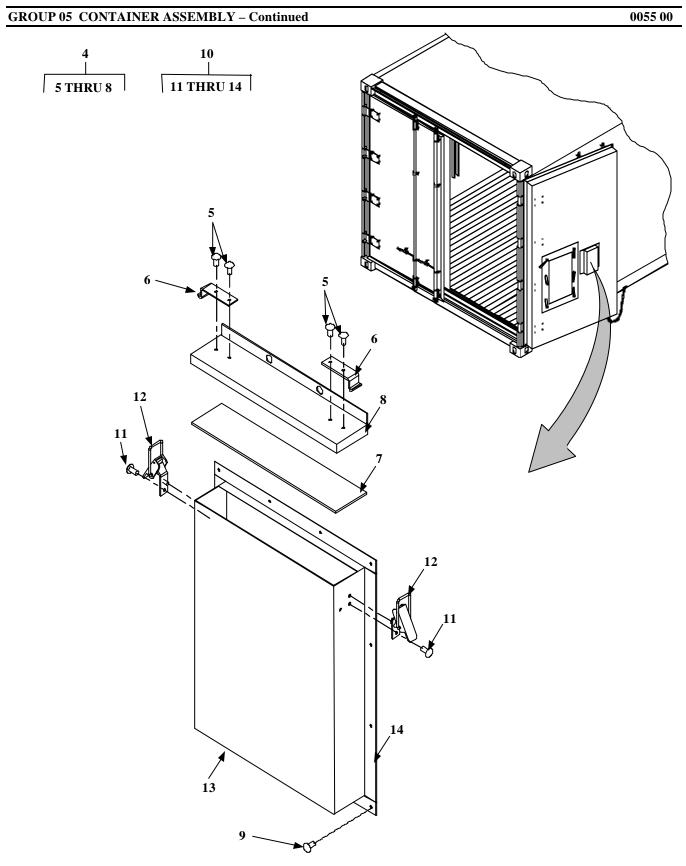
Document Holder and Identification Plate (Sheet 2 of 3)
